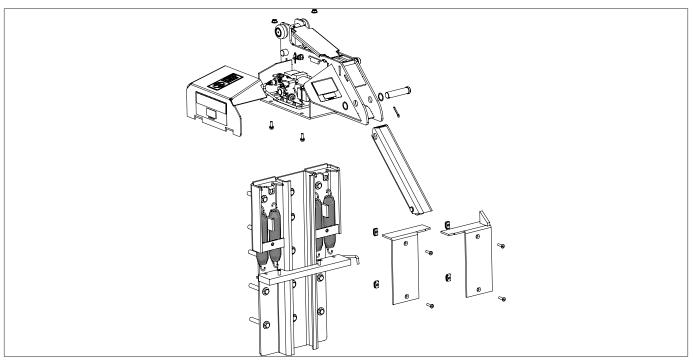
FIGURE F—INSTALLING CARRIAGE ASSEMBLY INTO ROLLER TRACK
